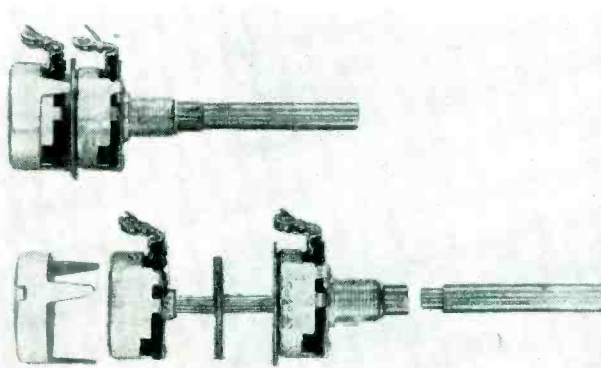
Views of replacement dual-concentric control, which can be used in Emerson 631, 632 and 633 chassis, built-up unit being shown above, and exploded view below.
